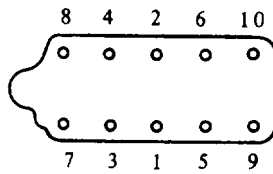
Tightening Sequence of Cylinder Head Bolts.
